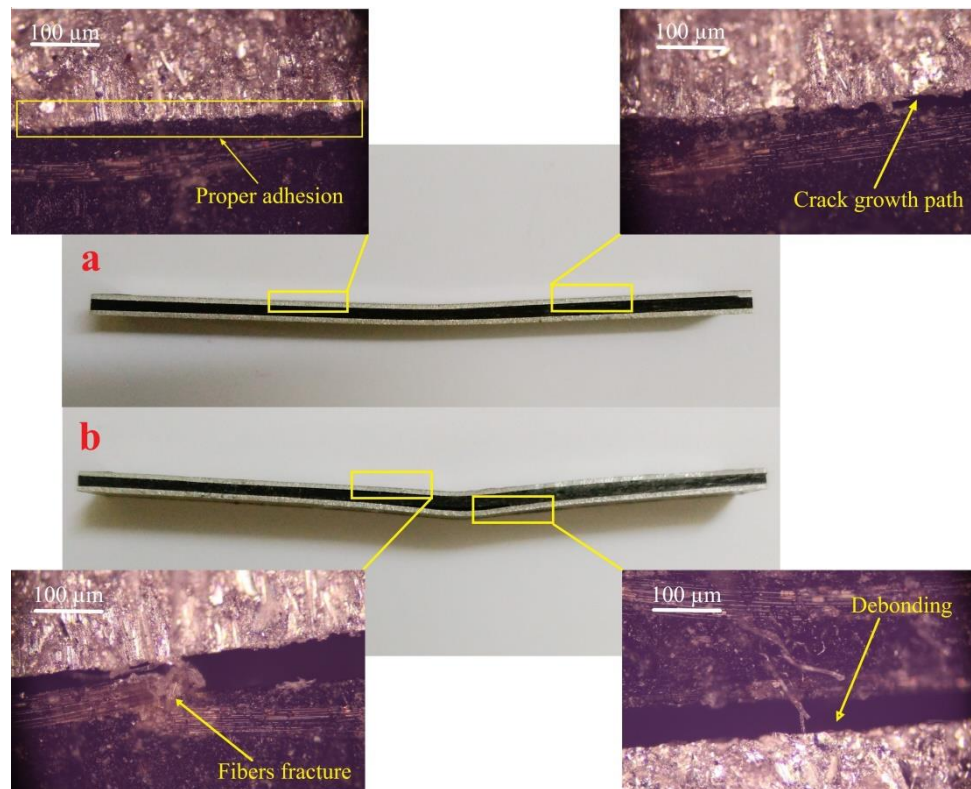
Failure modes after short-beam shear test, (a) longitudinal specimen, (b) transversal specimen.
